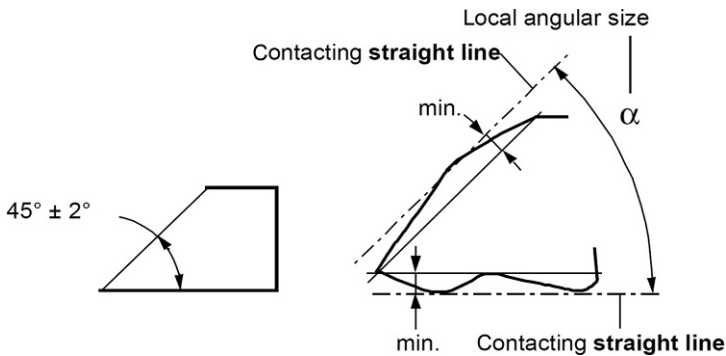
Angular dimension tolerance, actual angular size
